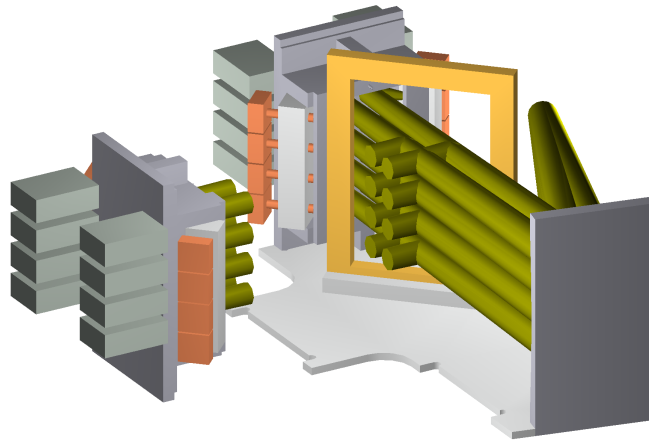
Drawing of the 4K assembly. Two mixer units, the polarizer grid and the first common mirror of the array optics are sandwiched between two identical, CNC-machined plates (top plate not shown here).
